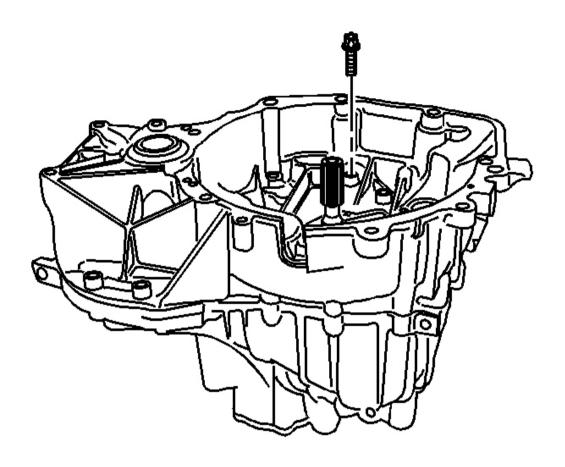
View Of Clutch Housing Side Transmission Housing Bolt Courtesy of GENERAL MOTORS CORP.
